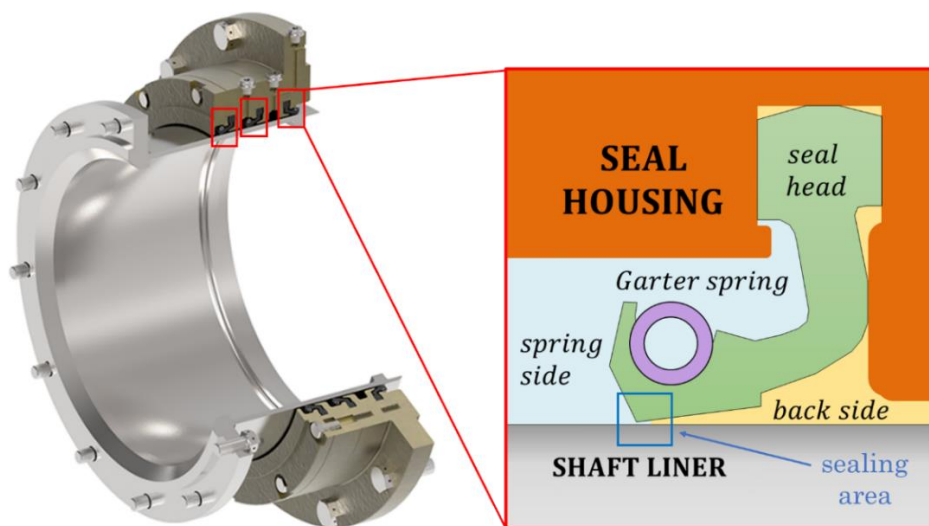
Stern tube seal aft package. Source: Wärtsilä.
